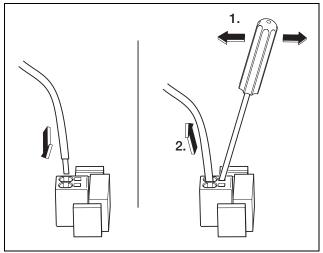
Spring-loaded terminal strip: Fastening the cable (left), detaching the cable (right)
